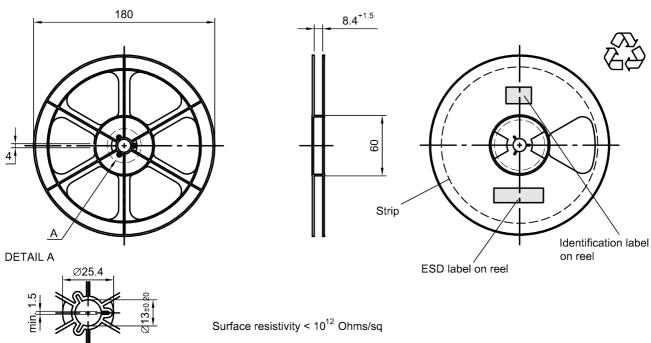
Drawing of reel (first-angle projection) with diameter of 180 mm.
